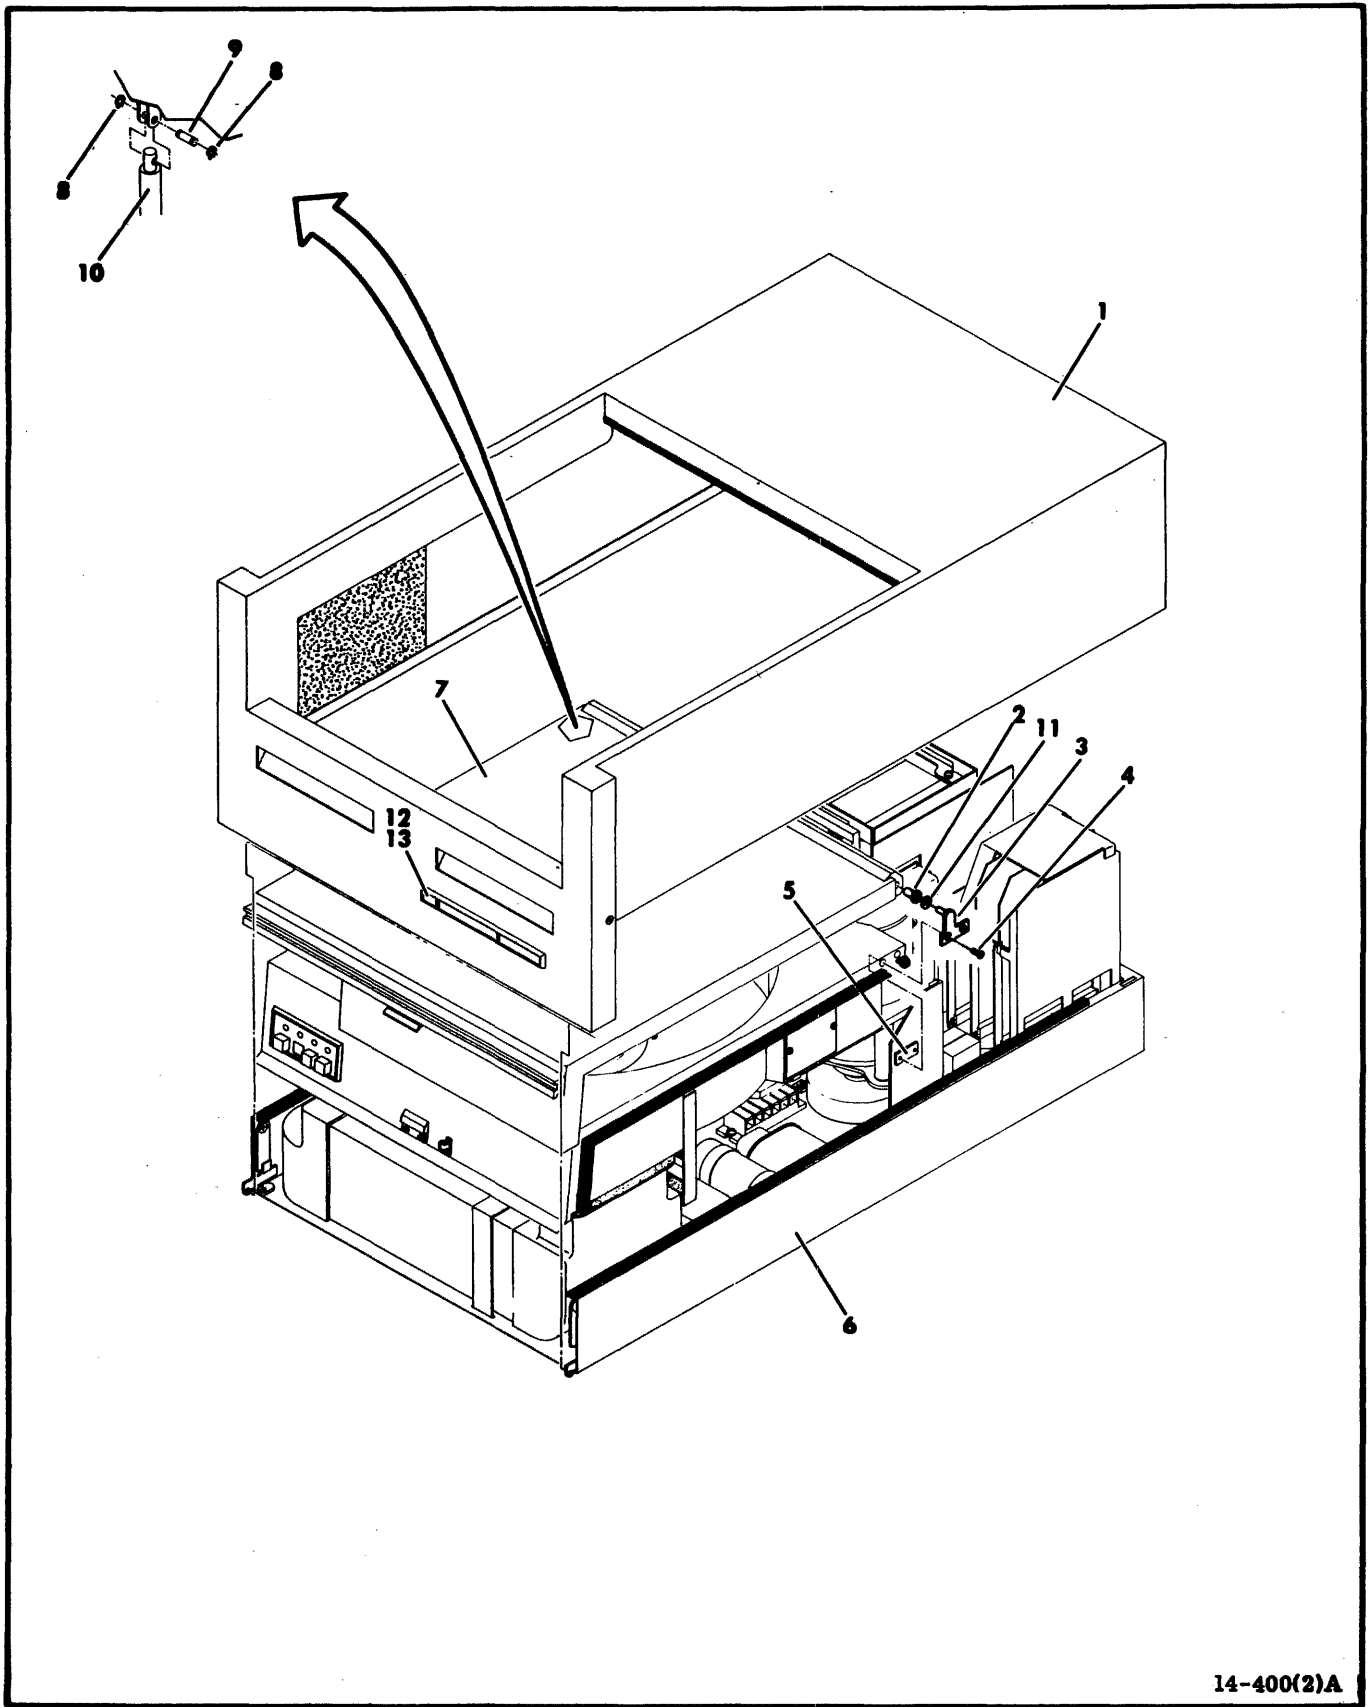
Final Assembly - Acoustic Cabinet (Sheet 3 of 3)
